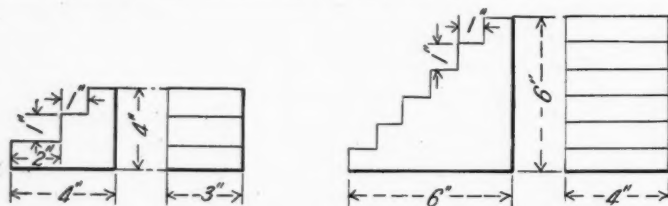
Chucking Blocks for Vertical Boring Mill or Planer.
